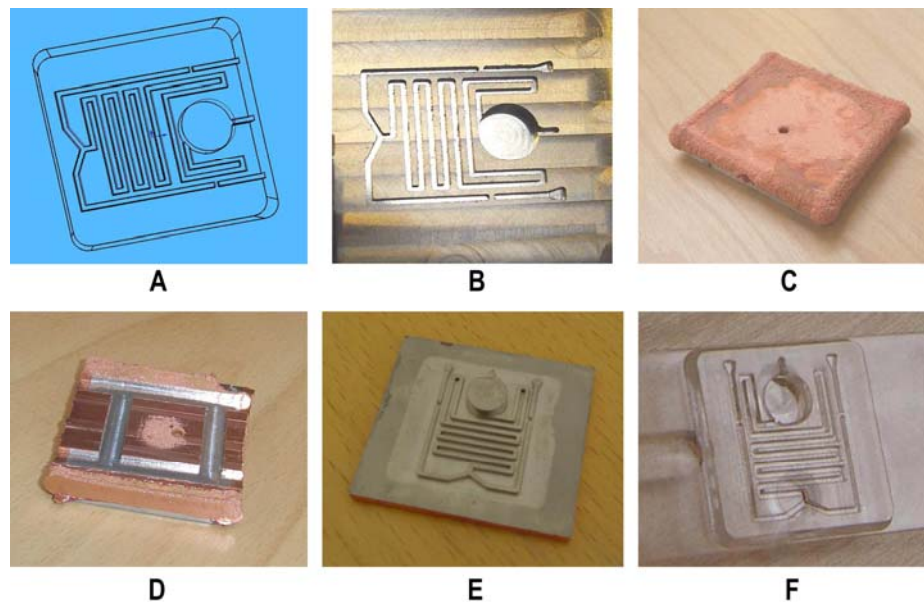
Complete process chains for the manufacture of a polymer micro fluidic platform from design to final polymer part based on an indirect hybrid tooling method: (A) part design, (B) micro milling of the micro features positive geometry on aluminium substrate, (C) nickel and copper deposition by electroplating, (D) insert machining for dimensional fitting, (E) insert obtained after aluminium dissolution (with
